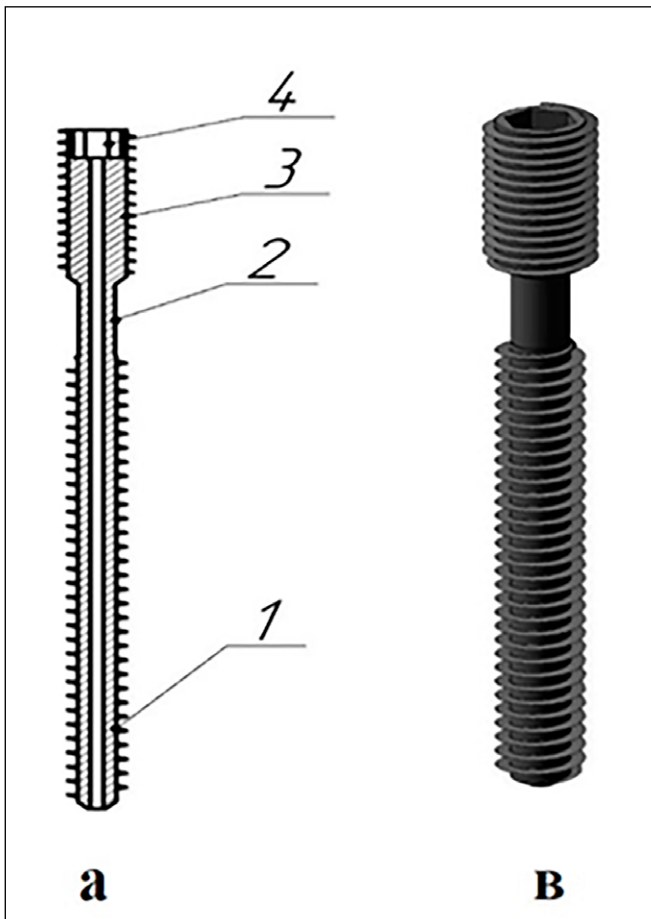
Schematic representation of the counter-compressing screw, where: a) screw drawing (1 – thread with a diameter of 7 mm; 2 – screw body; 3 – thread with a diameter of 9 mm; 4 – hexagonal hole for the key.), b) overall view of the screw (3D model).
